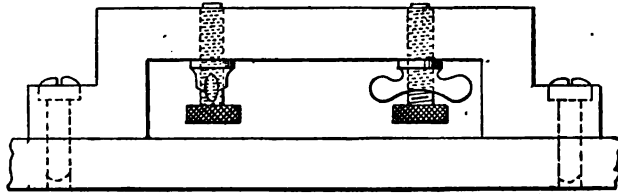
Fixture for Supporting Piece Shown in Fig. 27.
